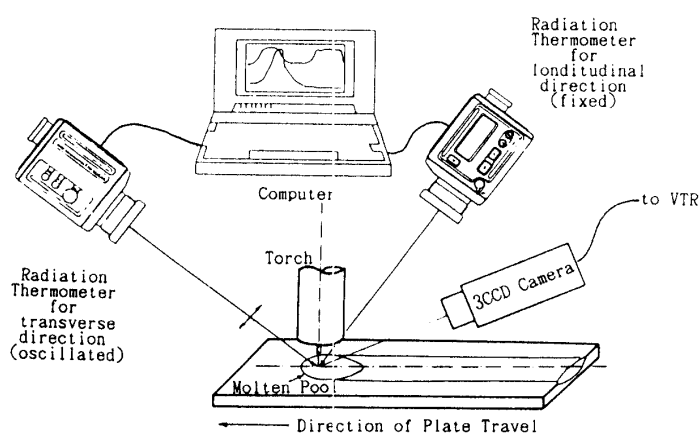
Schematic Illustration for oscillated Temperature Measurement Method of TIG Welded Molten Pool Surface by Radiation Thermometer.
